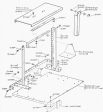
EXPLODED VIEW AND OTHER MECHANICAL PARTS IDENTIFIED
